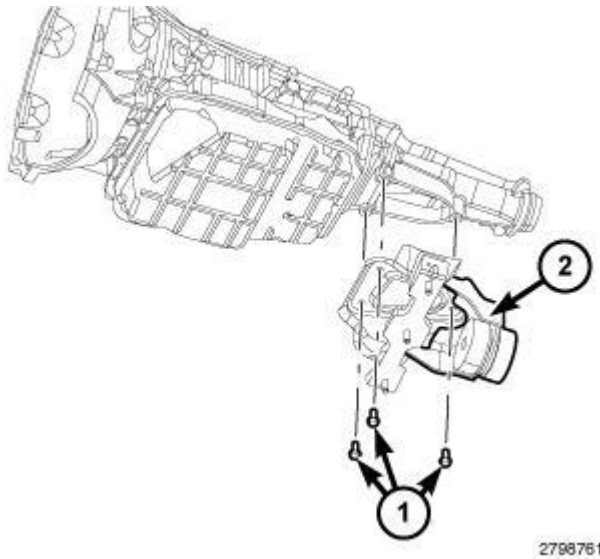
Rear Transmission Mount & Bolts - 68RFE A/T - 4X2 Crew & Mega Cab Models
